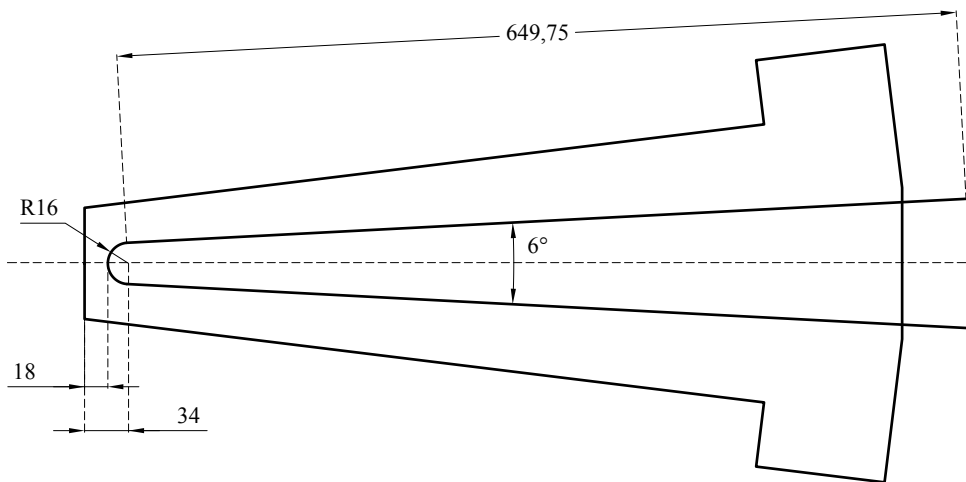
Top view of geometric form of the cooling pipe with dimensions and positioning parameters. The line is the centric axis of the tube. All dimensions are in mm. R specifies the radius.
